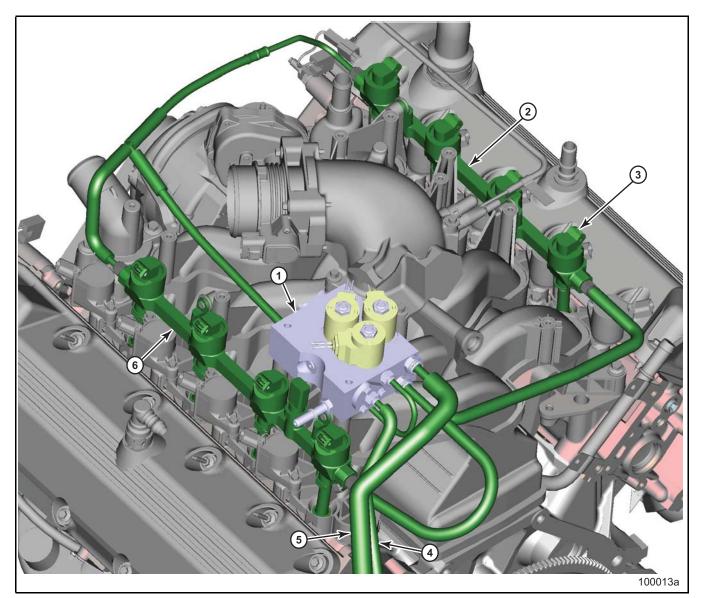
Fuel Rail Pressure Control Module (FRPCM)
